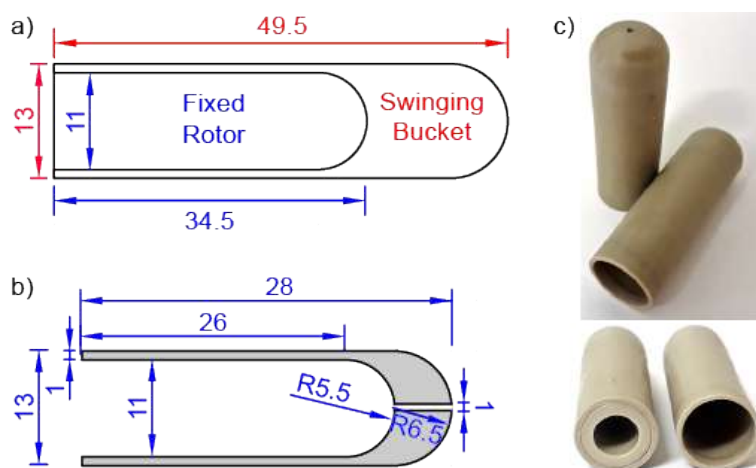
a) An overlay of the swinging bucket and fixed rotor internal dimensions, highlighting the difference, b) the dimensions of the adaptor and c) photographs of the adaptor with, and without, the MLA-150 tool inside. “R” preceding a value denotes the radius of a curve.
